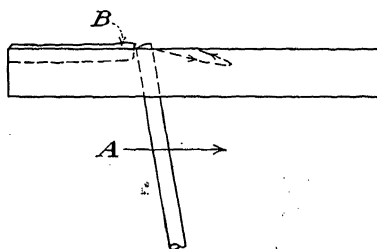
Side view of butt weld. A. Direction of welding. B. Penetration bead.
